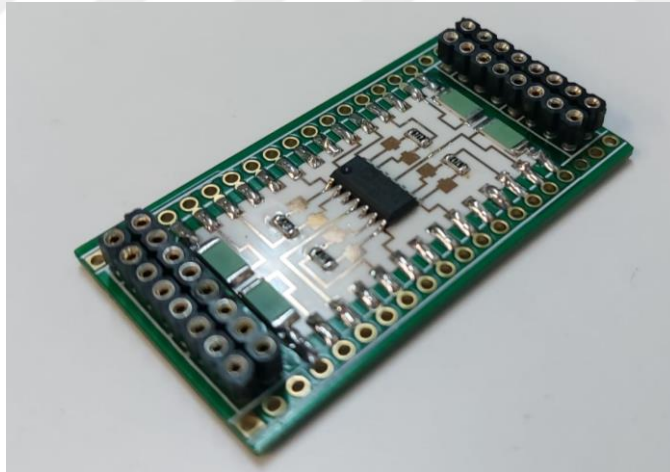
Completed soldering process of alumina TIA circuit and PCB with surface mount elements.
